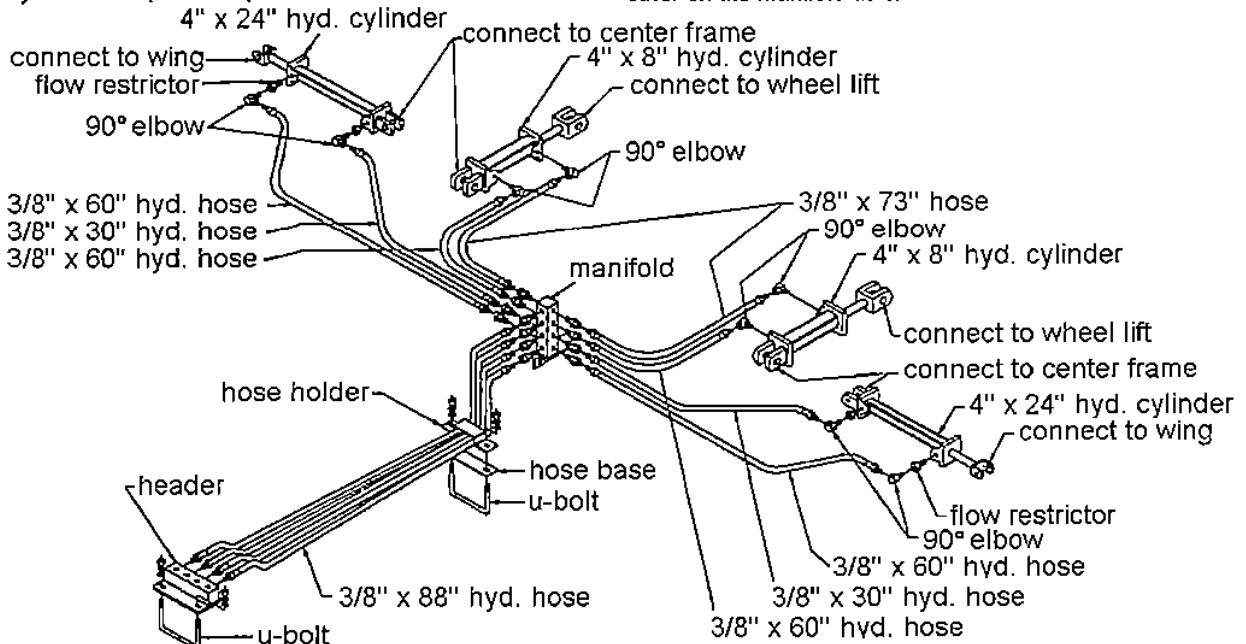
HYDRAULIC CIRCUIT ASSEMBLY
